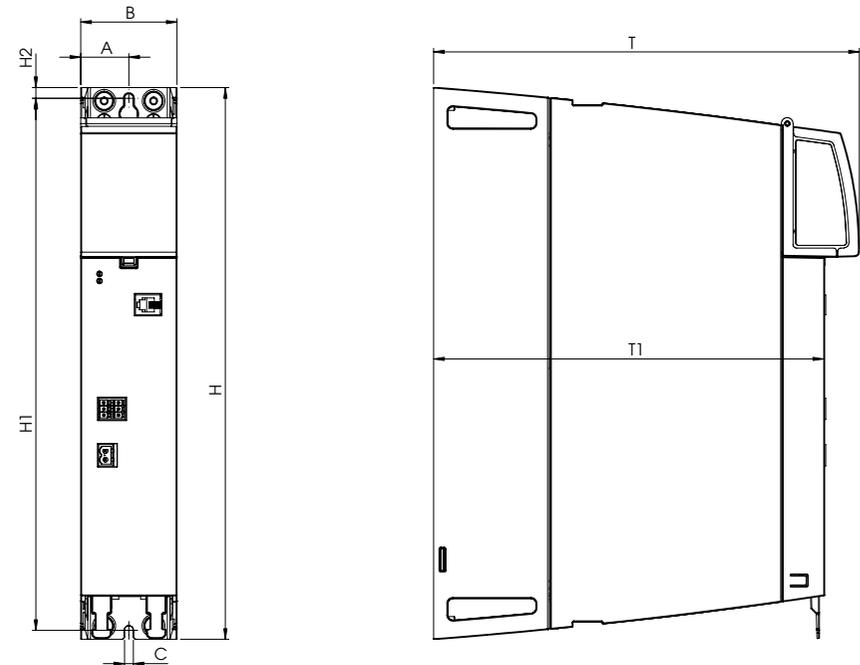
Dimensional drawing, supply unit BG1, for dimensions see Table 3.1
